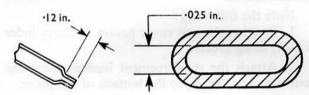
Dimensional details of crimped end of rocker shaft oil pipe. The shape and aperture width of the crimped portion are shown in the enlarged section
